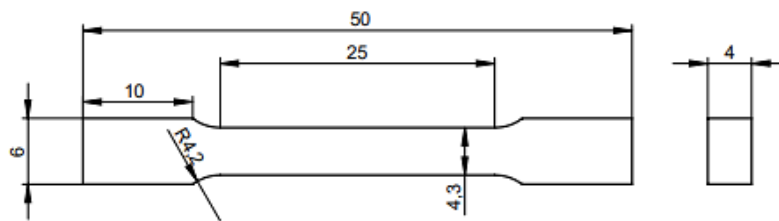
Geometry and dimensions of the uniaxial tensile specimens.
